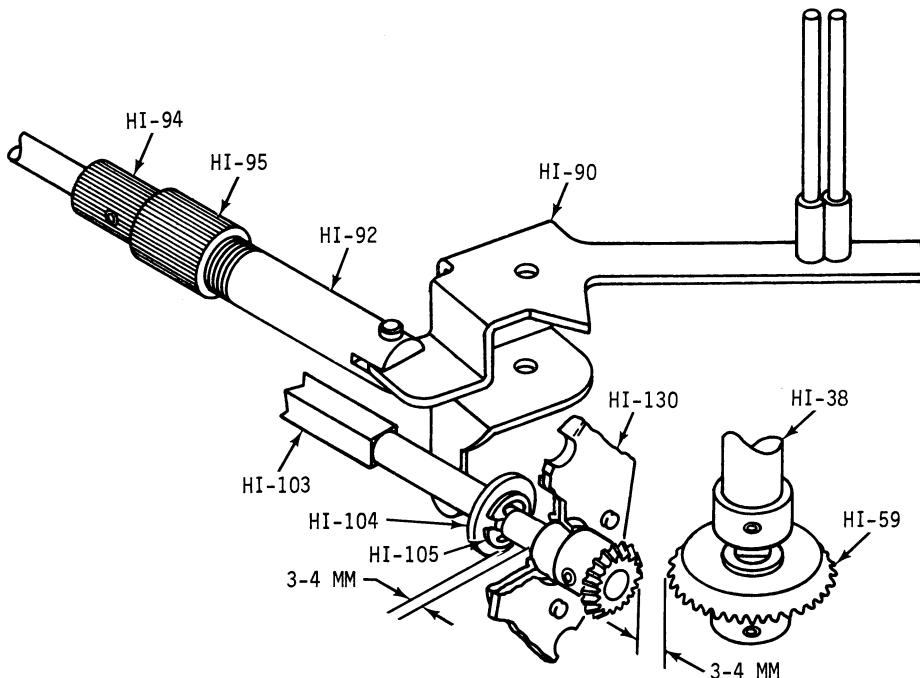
DRIVING SLIDE SHAFT A - ADJUSTMENT
